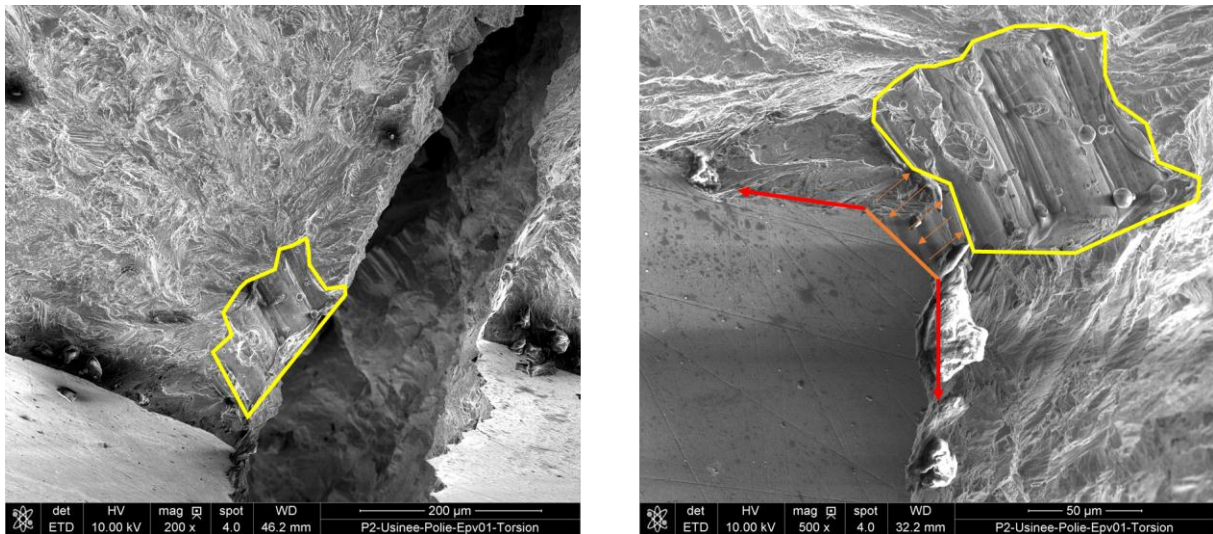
Fracture surfaces of total-polished specimen under torsion loading
